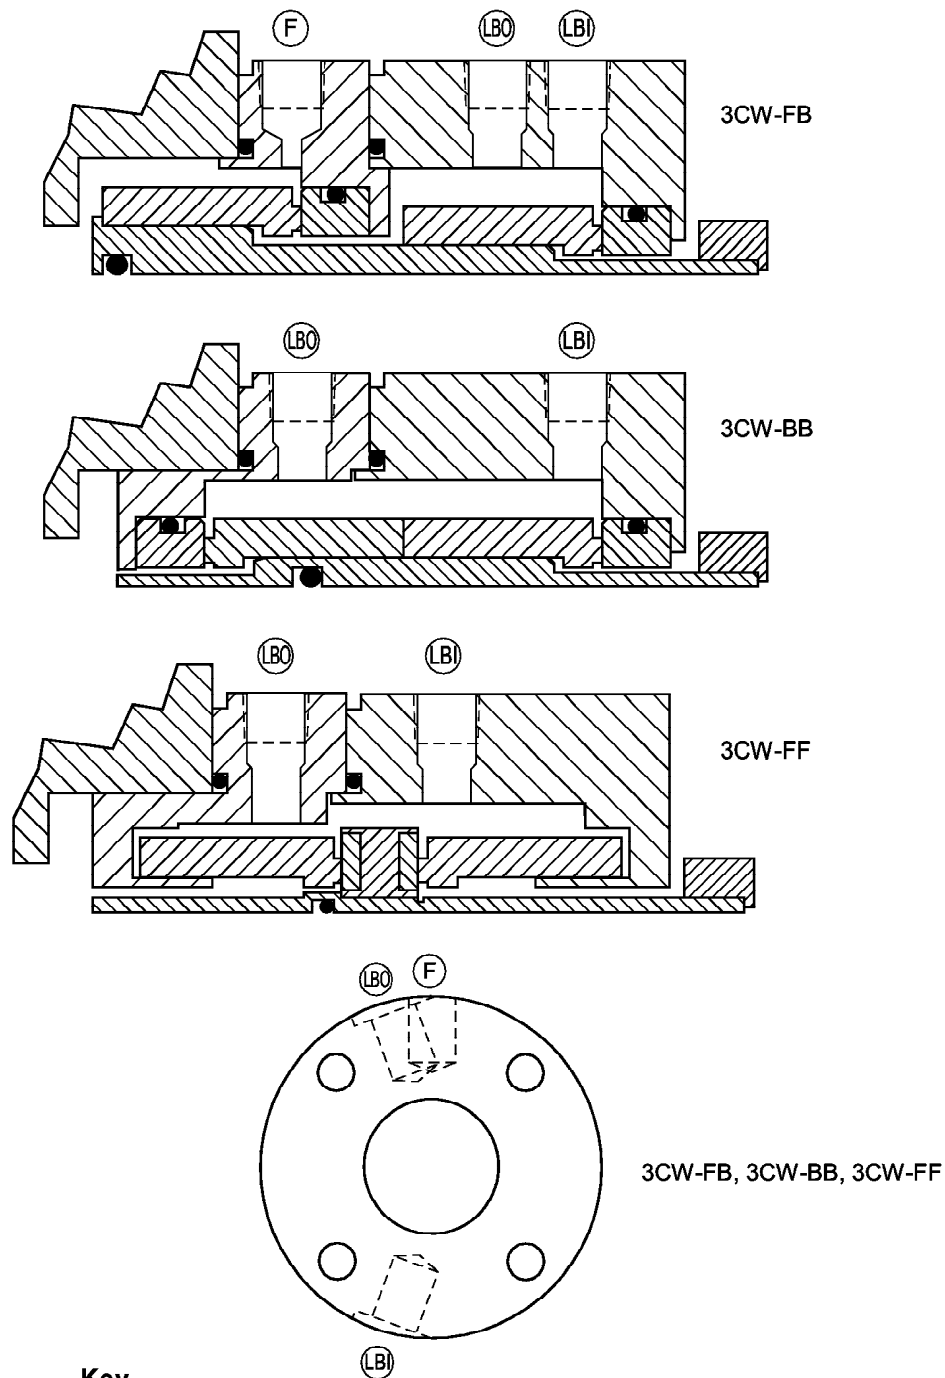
Arrangement 2: Two seals per cartridge assembly with or without a gas buffer fluid
